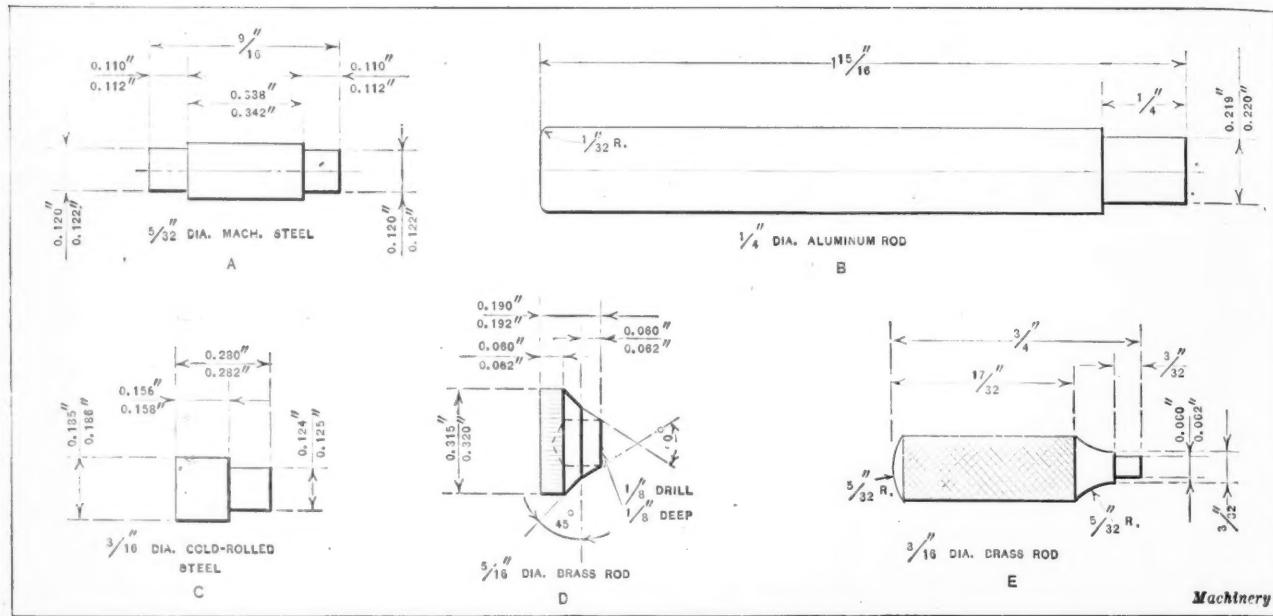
Examples of Work produced in from One and One-third to Three Seconds in Automatic Cutting-off and Turret Forming Machines
